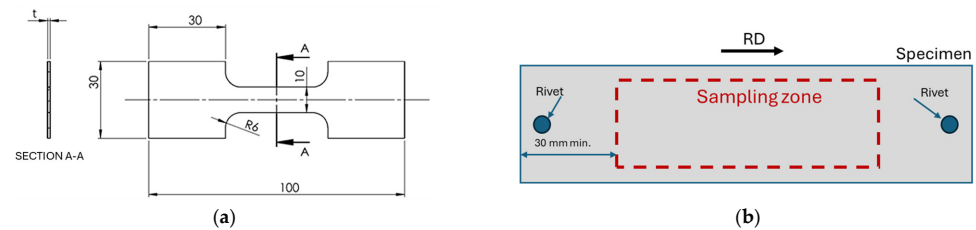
(a) Tensile sample scheme and dimensions (all dimensions in mm), reprinted from Ref. [15]; (b) schematic illustration of the ARB stack specimen, showing rivet placement and the central region selected for tensile and microstructure sampling.
